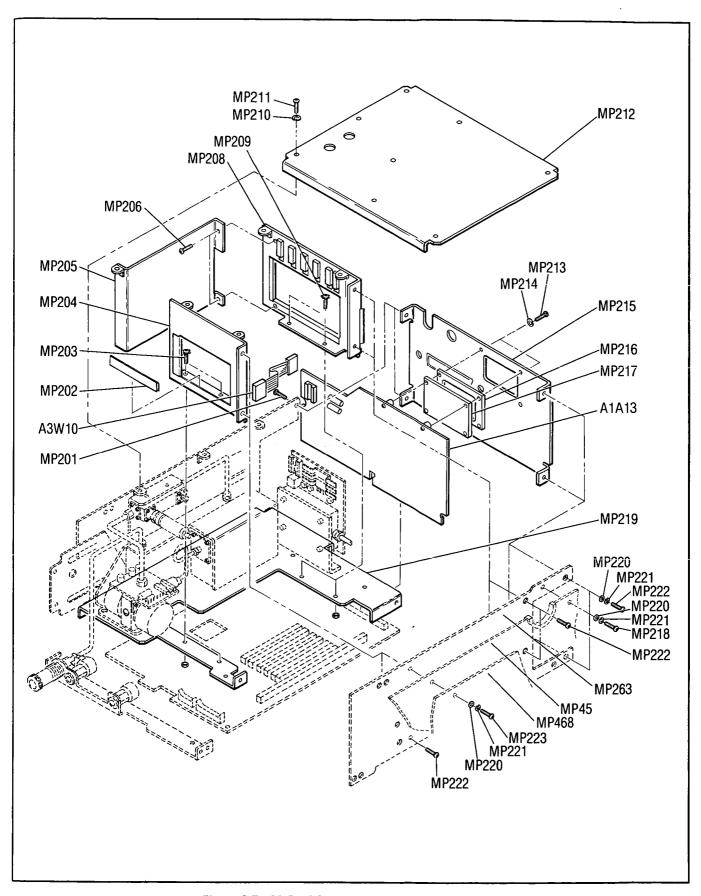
A1 Card Cage Illustrated Parts Breakdown
